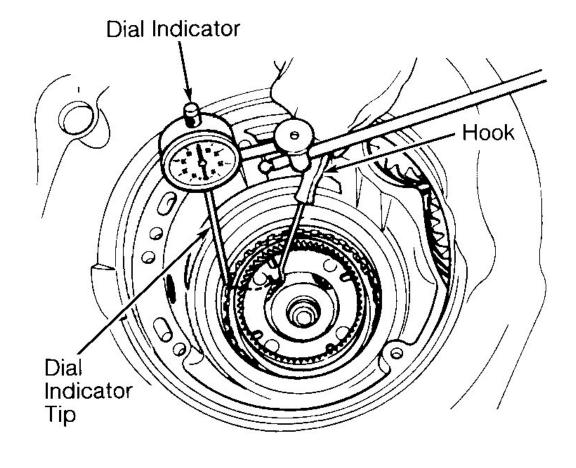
Checking Low-Reverse Clutch Clearance Courtesy of CHRYSLER LLC
